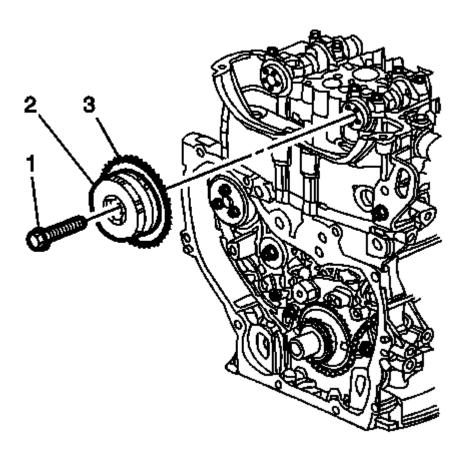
Timing Chain And Camshaft Position Actuator Courtesy of GENERAL MOTORS COMPANY
